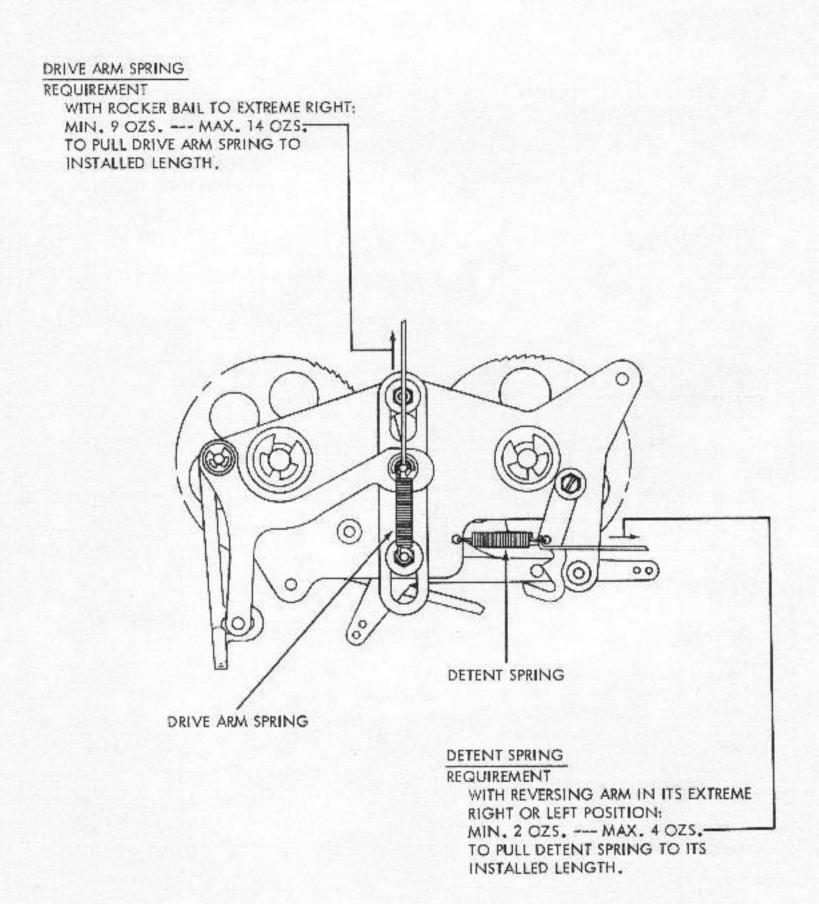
RIBBON FEED MECHANISM LATEST DESIGN
